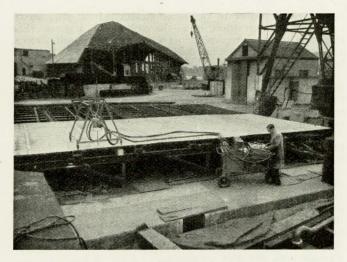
Mobile 140 kV X-ray set being used to examine welded plating assembly
